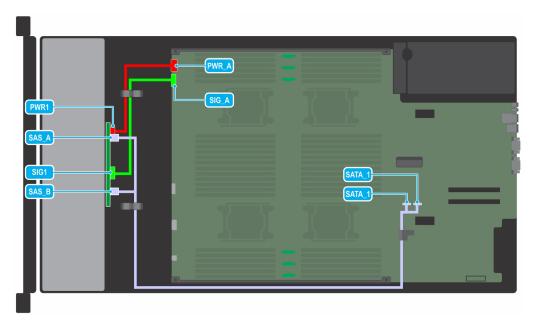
Cable routing - 8 x 2.5 inch, SATA drive backplane
